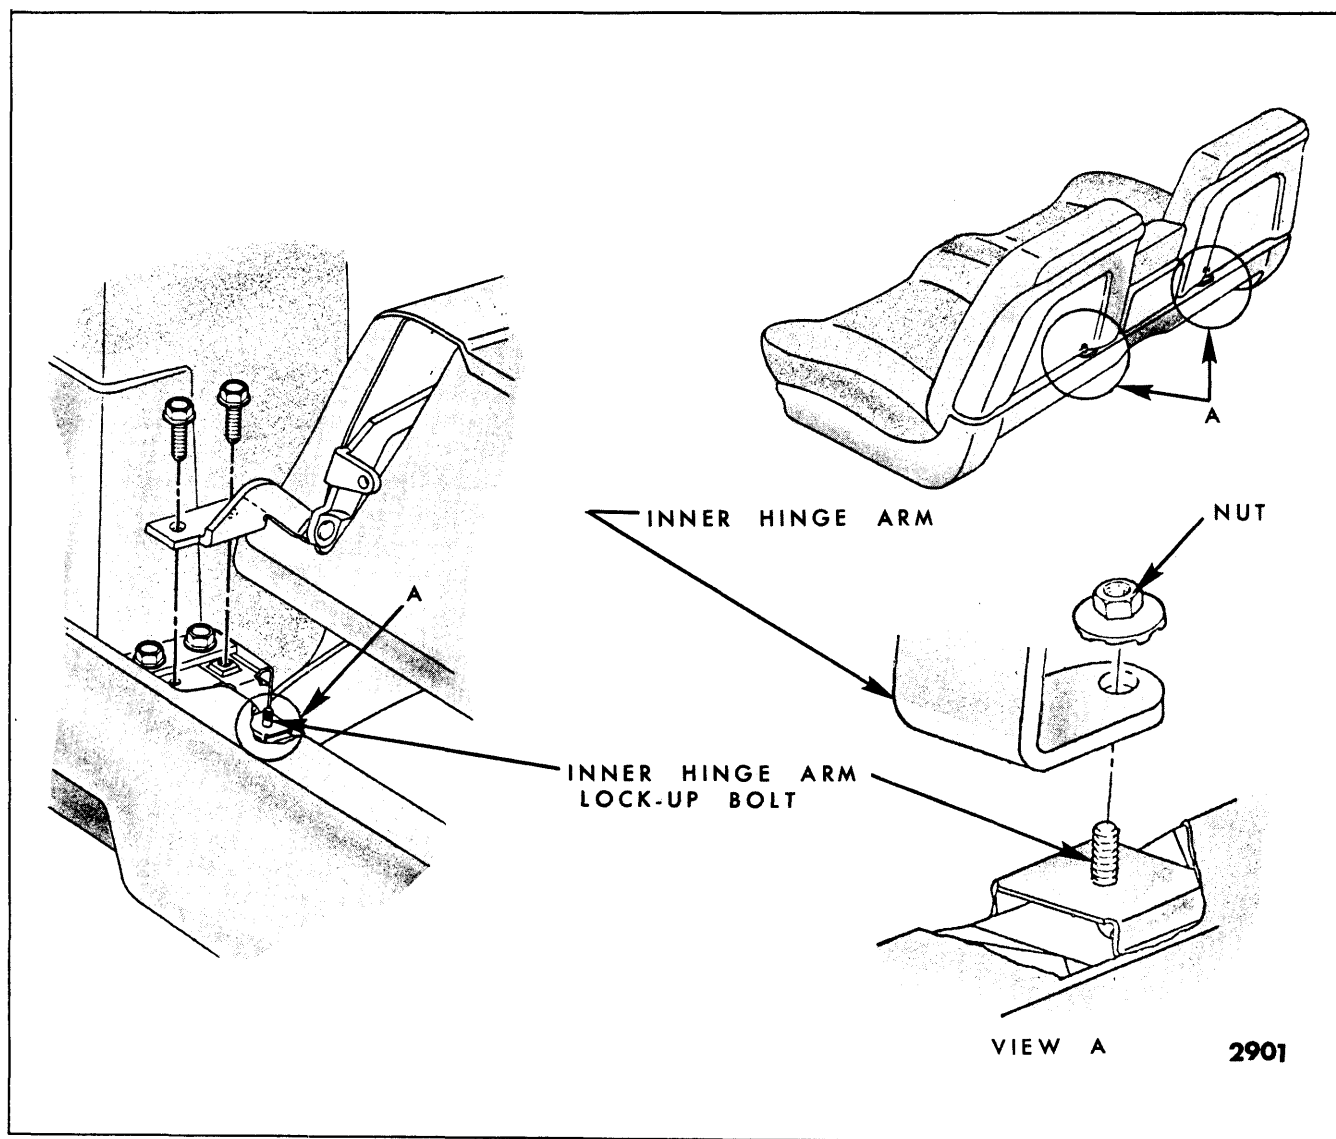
Strato Front Seat Back Assembly (Right or Left) Full Width Seat - 16639 Styles
